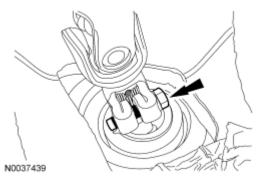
Locating Steering Intermediate Shaft Bolt Courtesy of FORD MOTOR CO.
